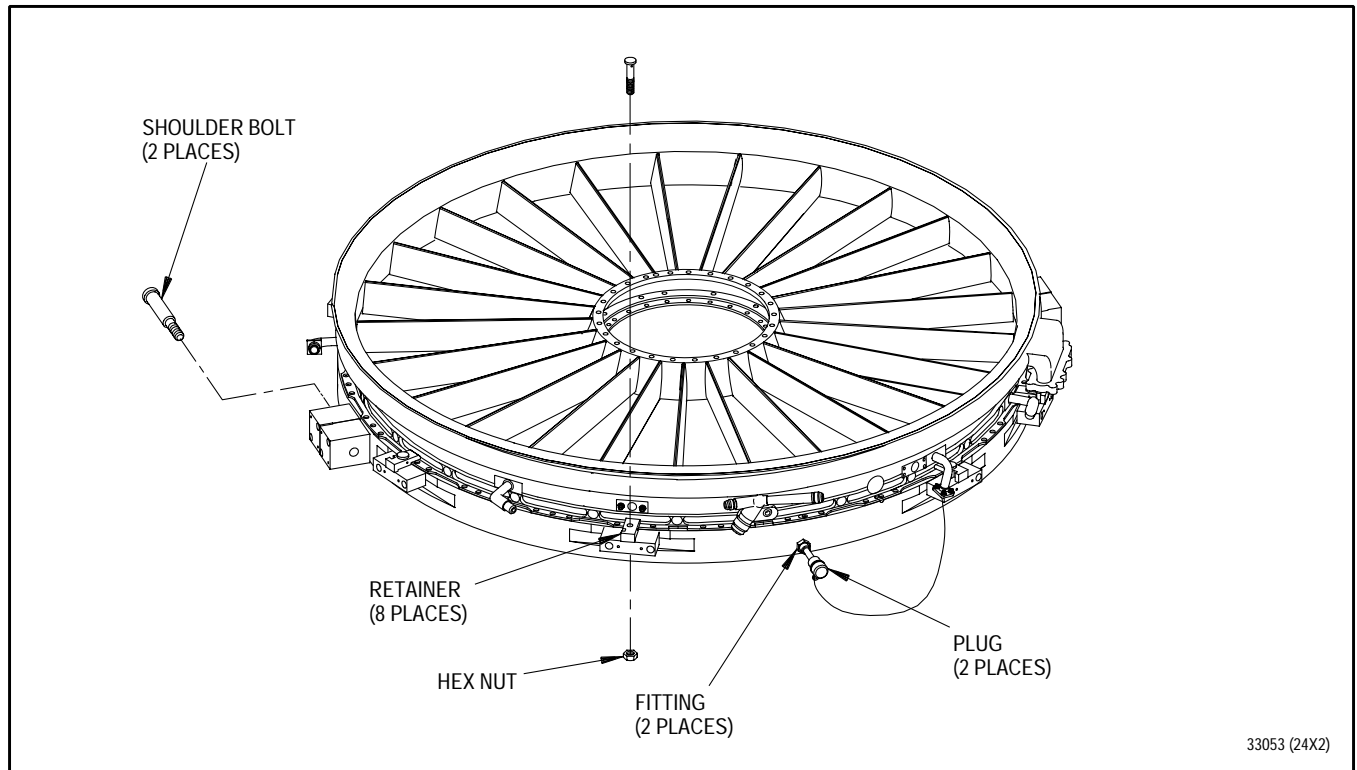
Fan Inlet Case - Installation On PWA 70804 Fixture
